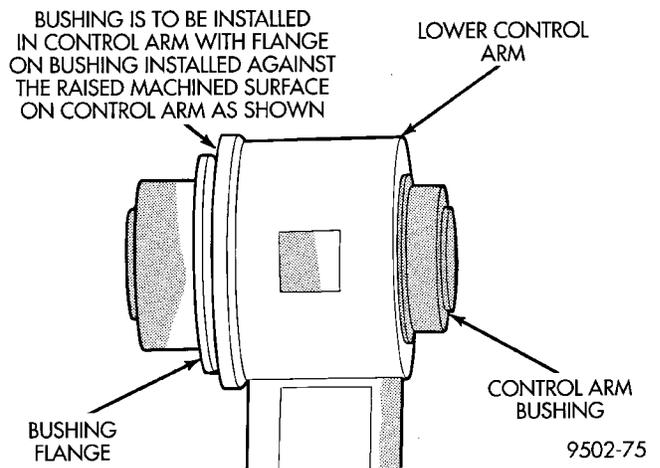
Installation Direction Of Lower Control Arm Front Bushing
